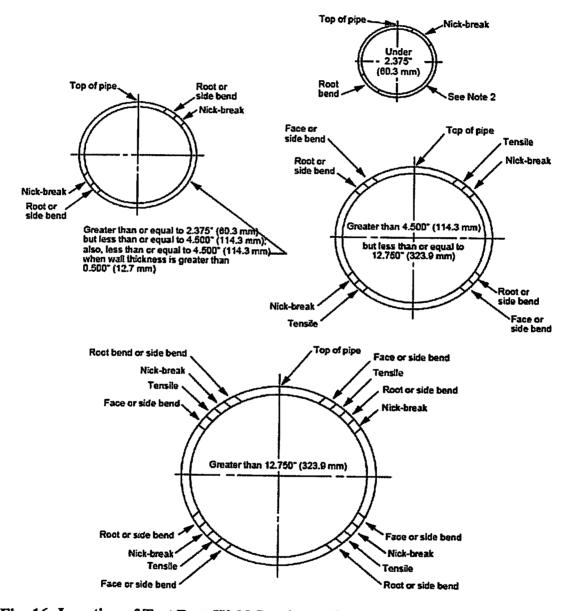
Location of Test Butt-Weld Specimens for Procedure Qualification Test Notes:
